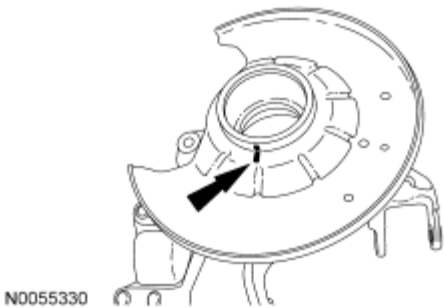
Identifying Index-Mark On Brake Disc Shield To Wheel Knuckle
